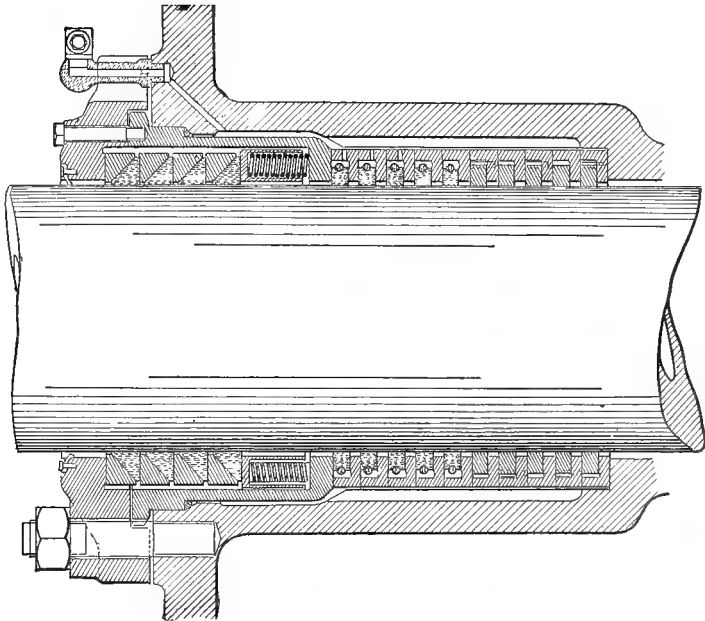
Removable Stuffing Box (Elsässische Maschinenbau-gesellschaft—Mühlheim)
